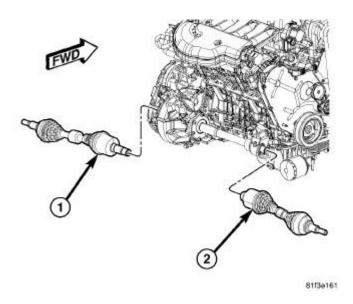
Intermediate Shaft & Right Halfshaft Courtesy of CHRYSLER GROUP, LLC
